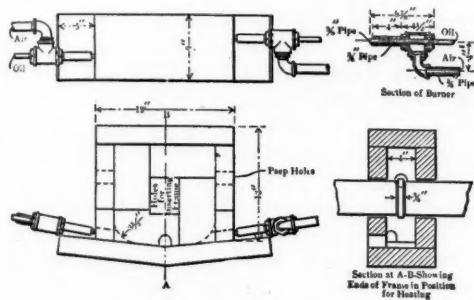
, FURNACE AND BURNER FOR WELDING LOCOMOTIVE FRAMES.
